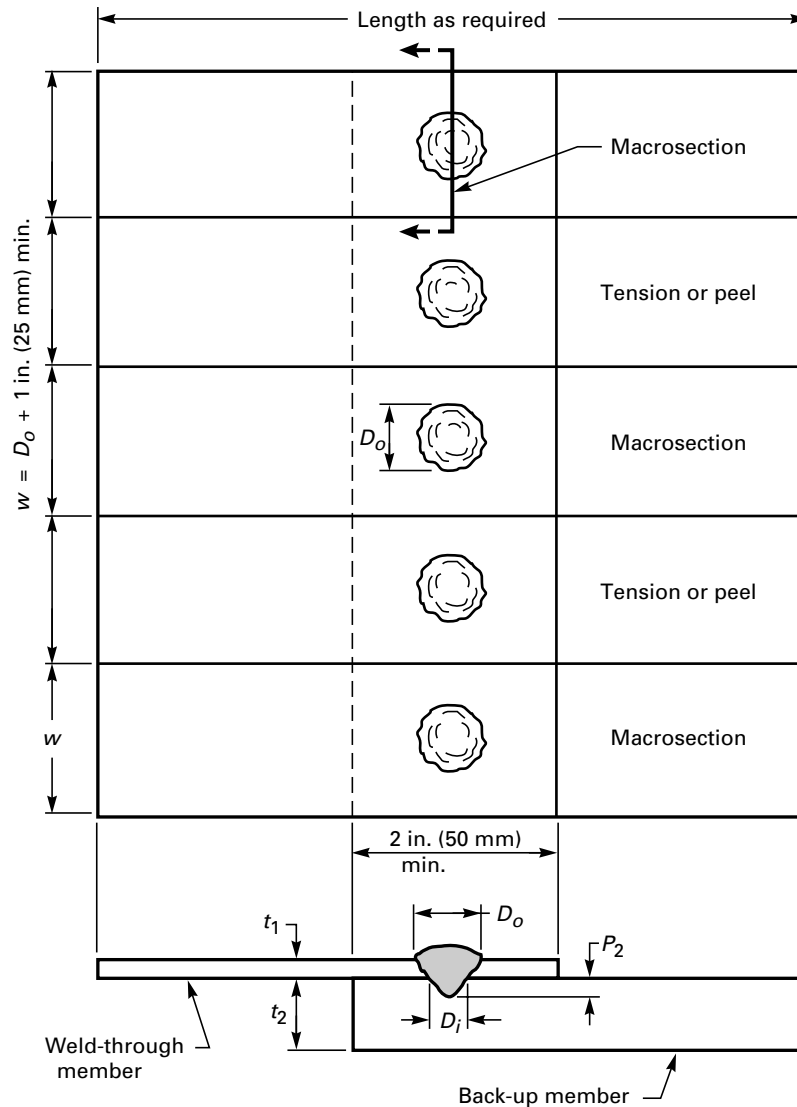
GAS METAL ARC-SPOT-WELD BLOCK FOR MACROSECTIONS AND STRENGTH TESTS
